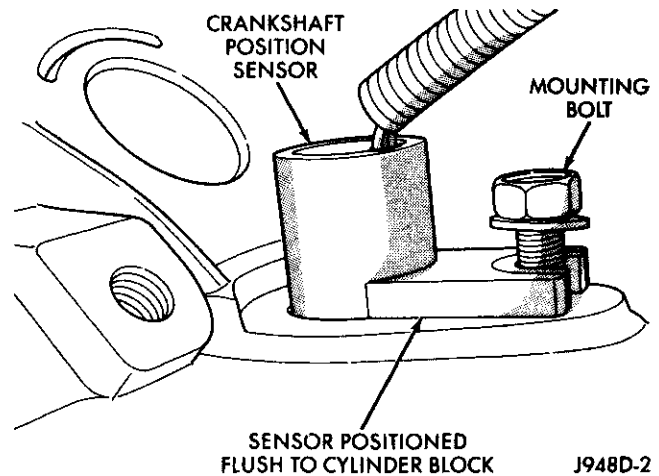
Sensor Removal/Installation—8.0L V-10 Engine
